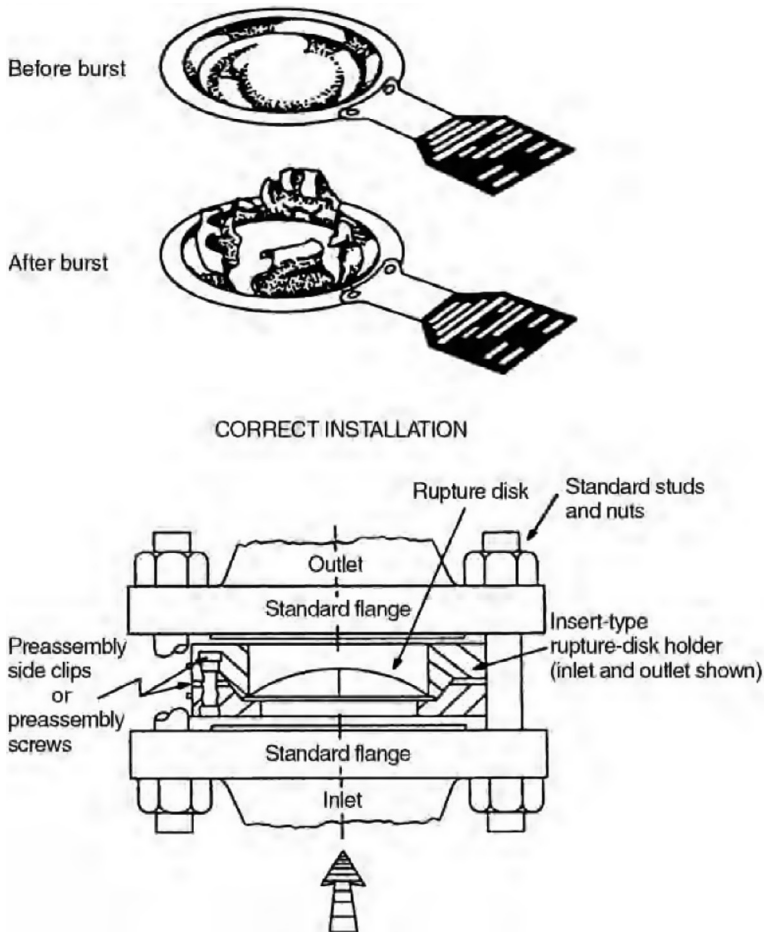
Conventional rupture disk. *Reproduced courtesy of the American Petroleum Institute [4].
